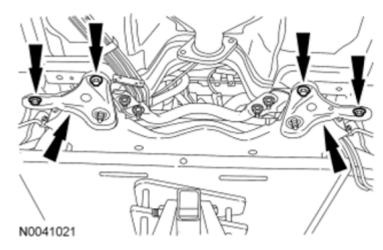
Locating Subframe Support Bracket Bolts Courtesy of FORD MOTOR CO.
